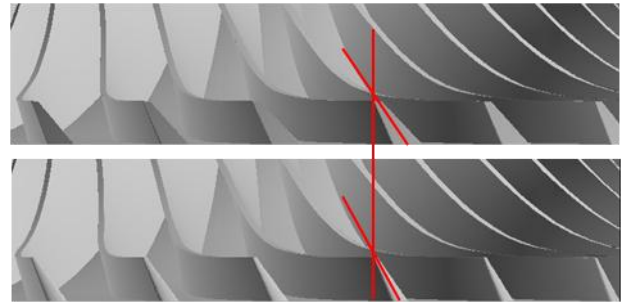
Top: CC3 impeller with constant radius trailing edge. Bottom: CC3 impeller with rounded trailing edge.
